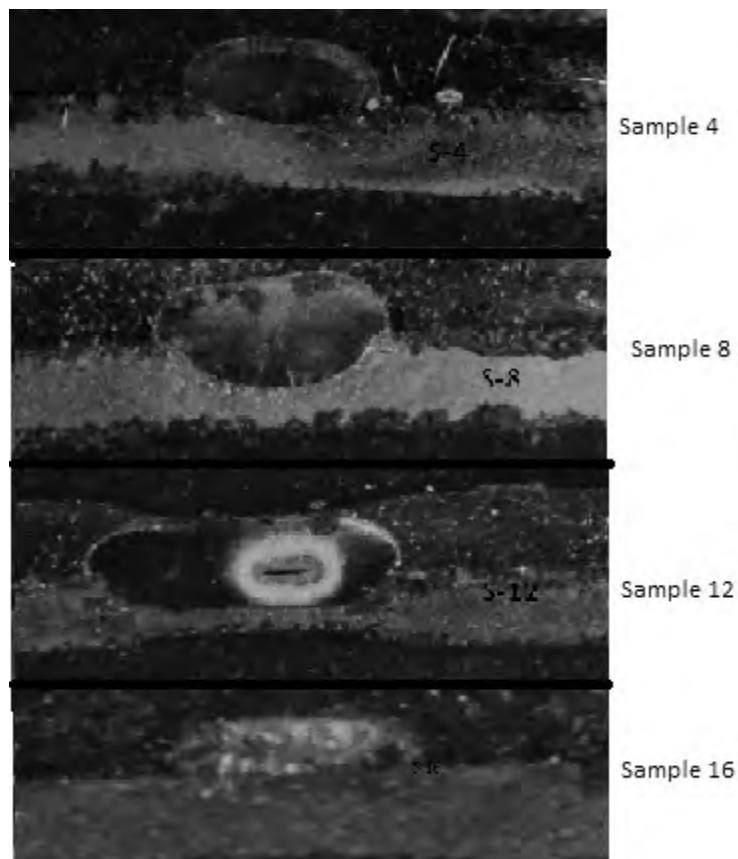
Effect of welding cycle at constant weld current 3 kA in macroscopic view.
